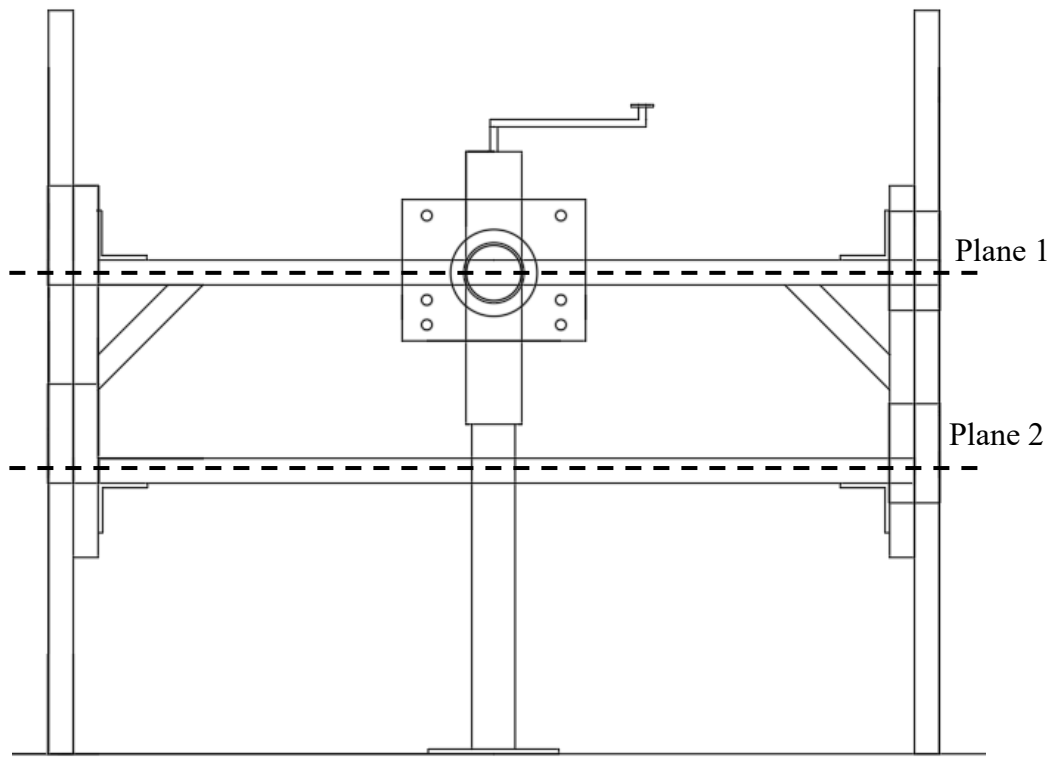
Section view of the field-focused pressure sinkage device in the fully retracted position.
